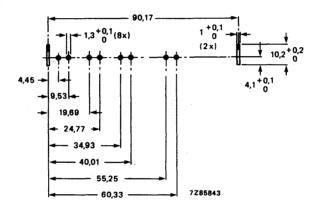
Piercing diagram viewed from solder side of board. Unless otherwise stated the tolerance is \pm 0,05 mm.
